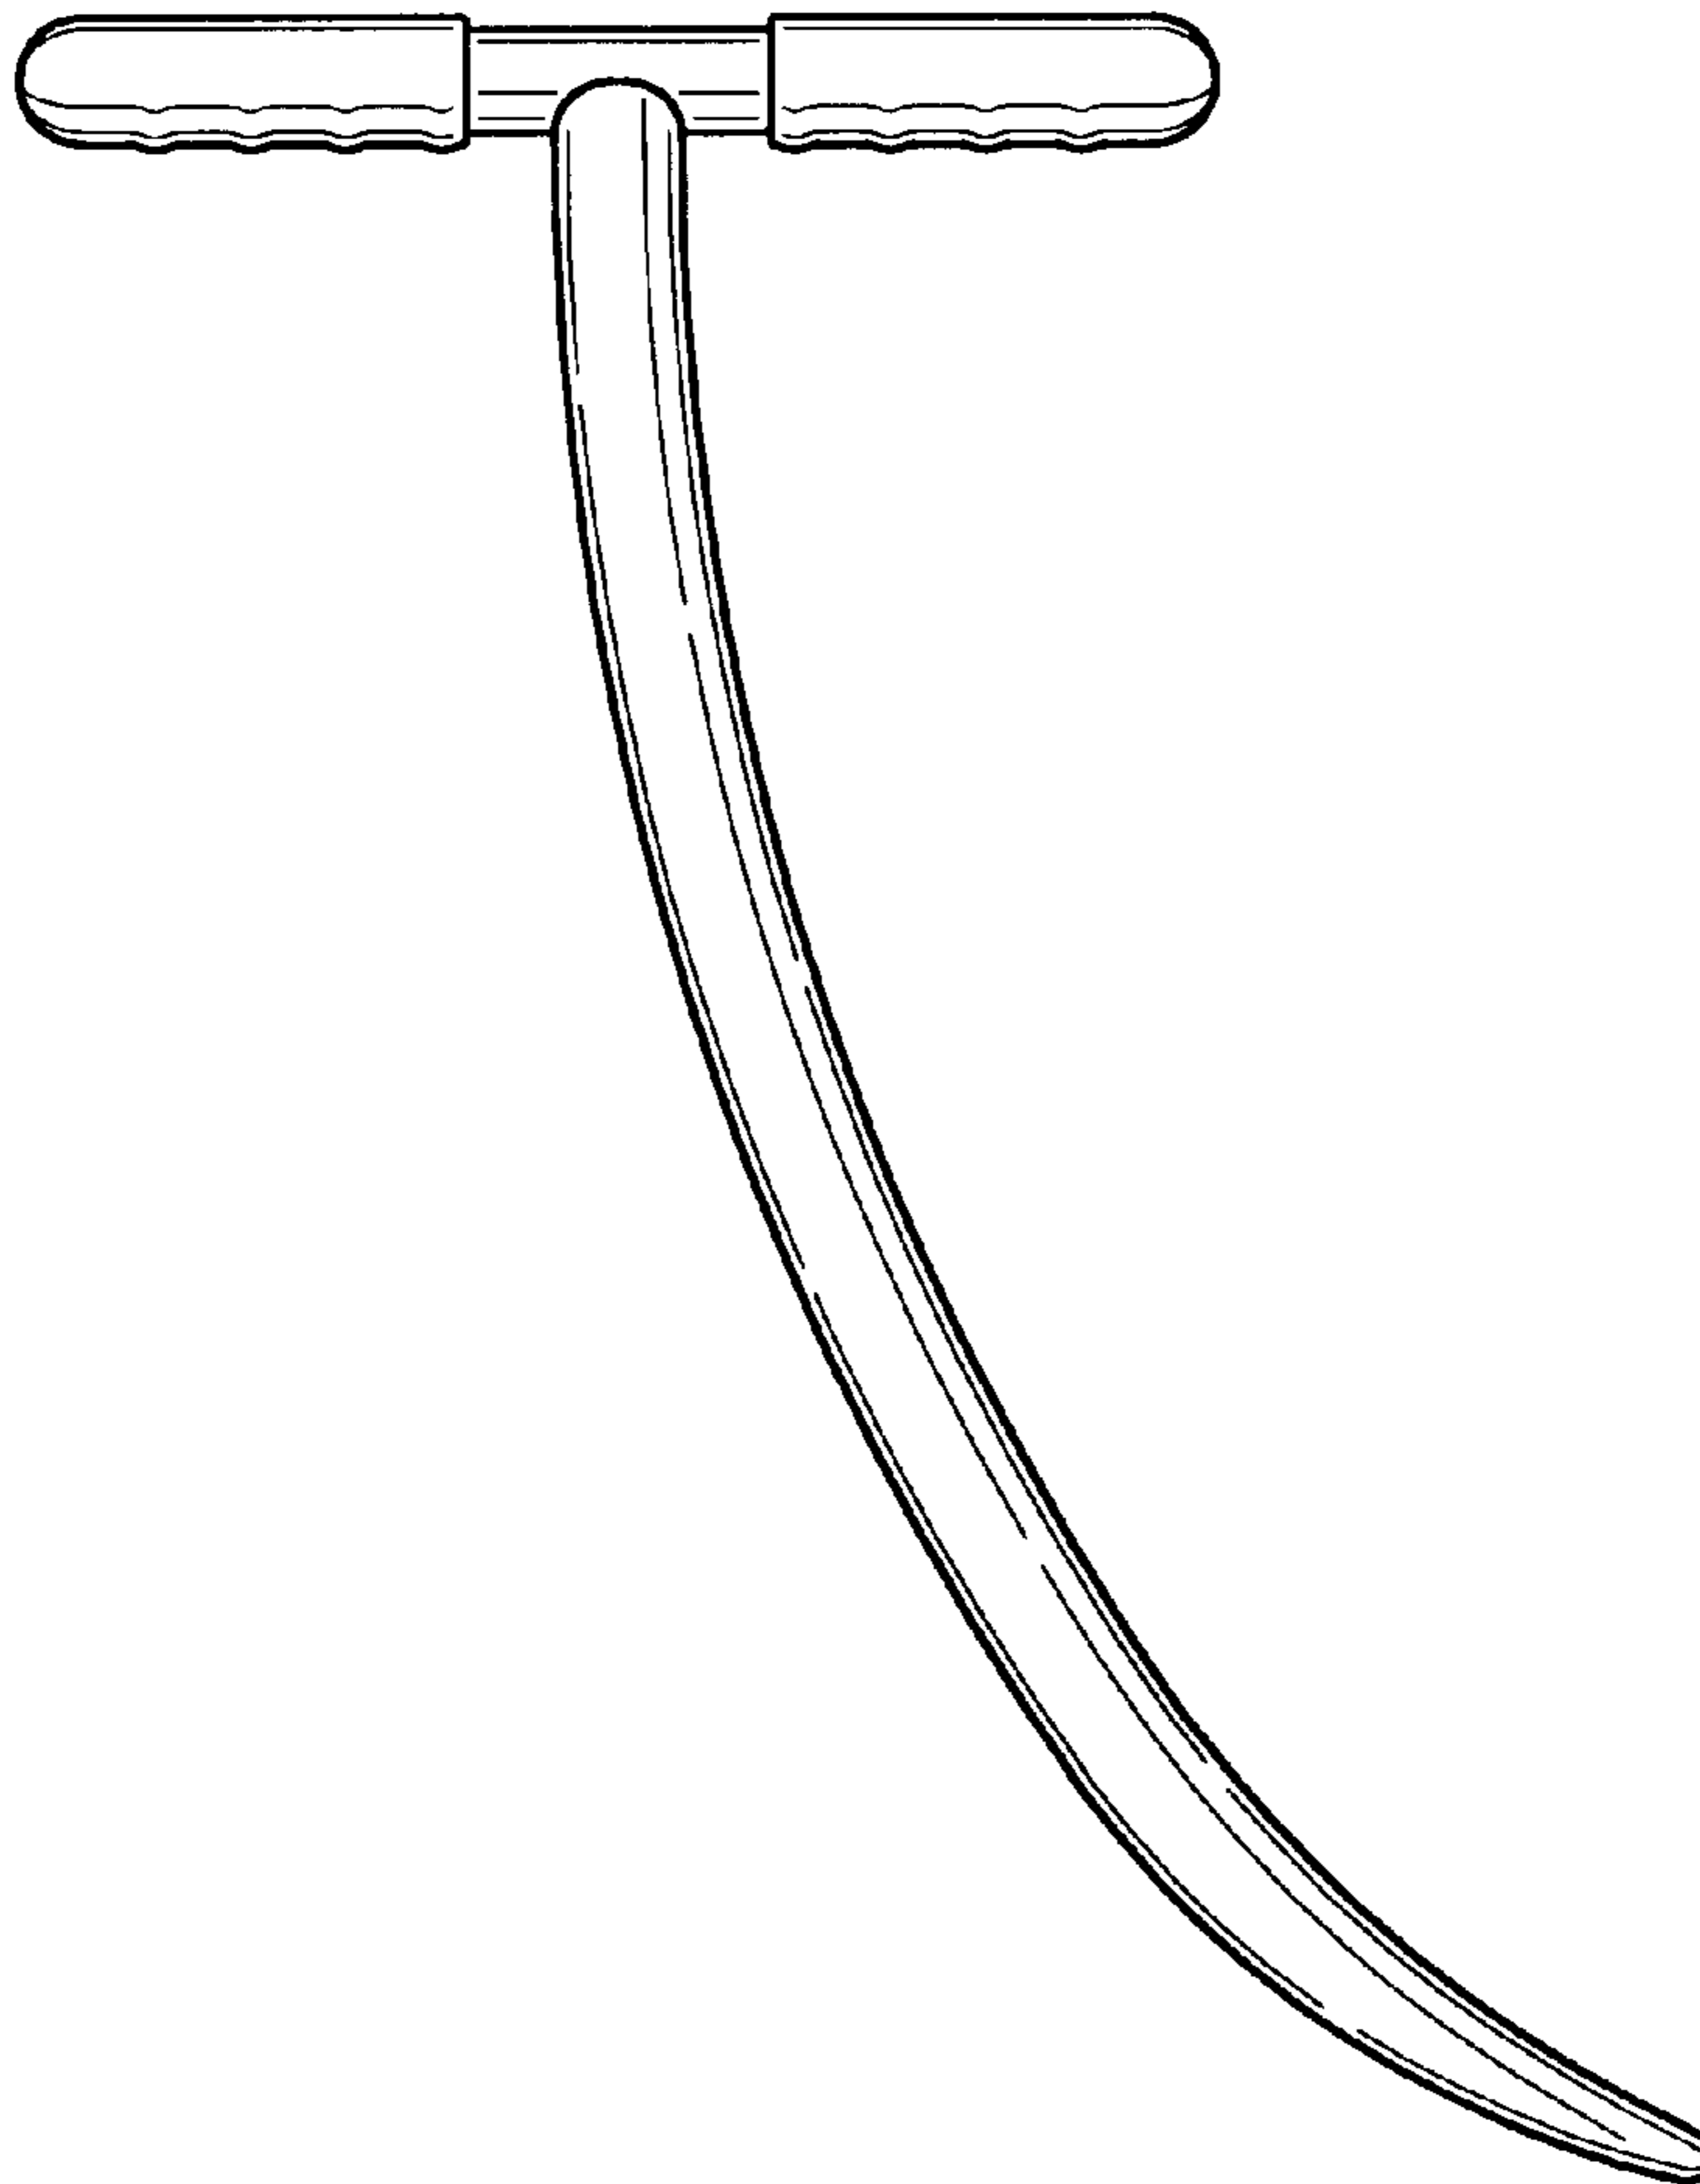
is a left side elevational view of the shingle stripping tool of the present invention;
